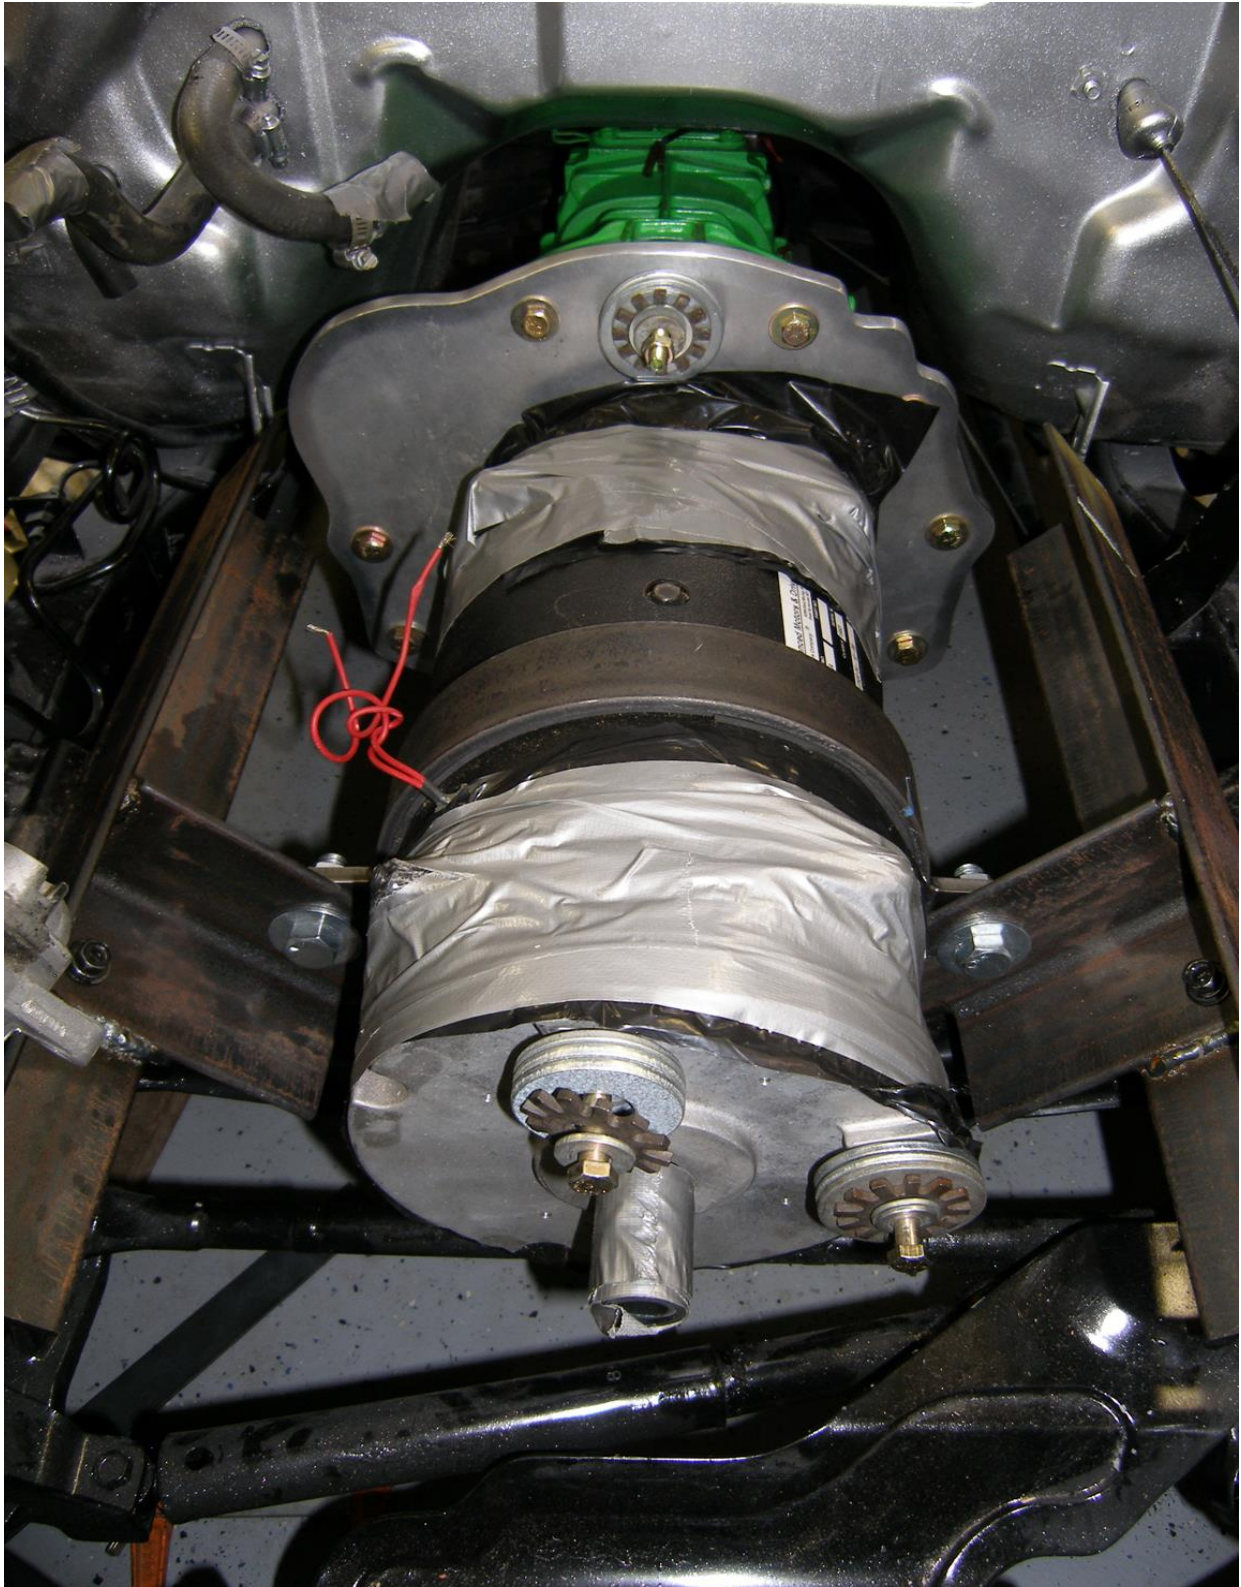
12 The final bolted and welded configuration of the motor mounts and motor.
